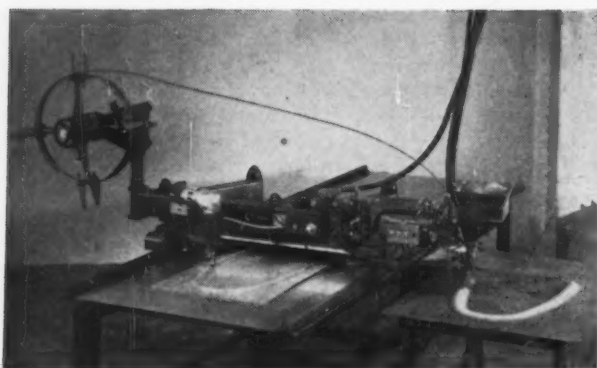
A TEMPLATE GUIDES THE WELDING HEAD TO ANY DESIRED CONTOUR
